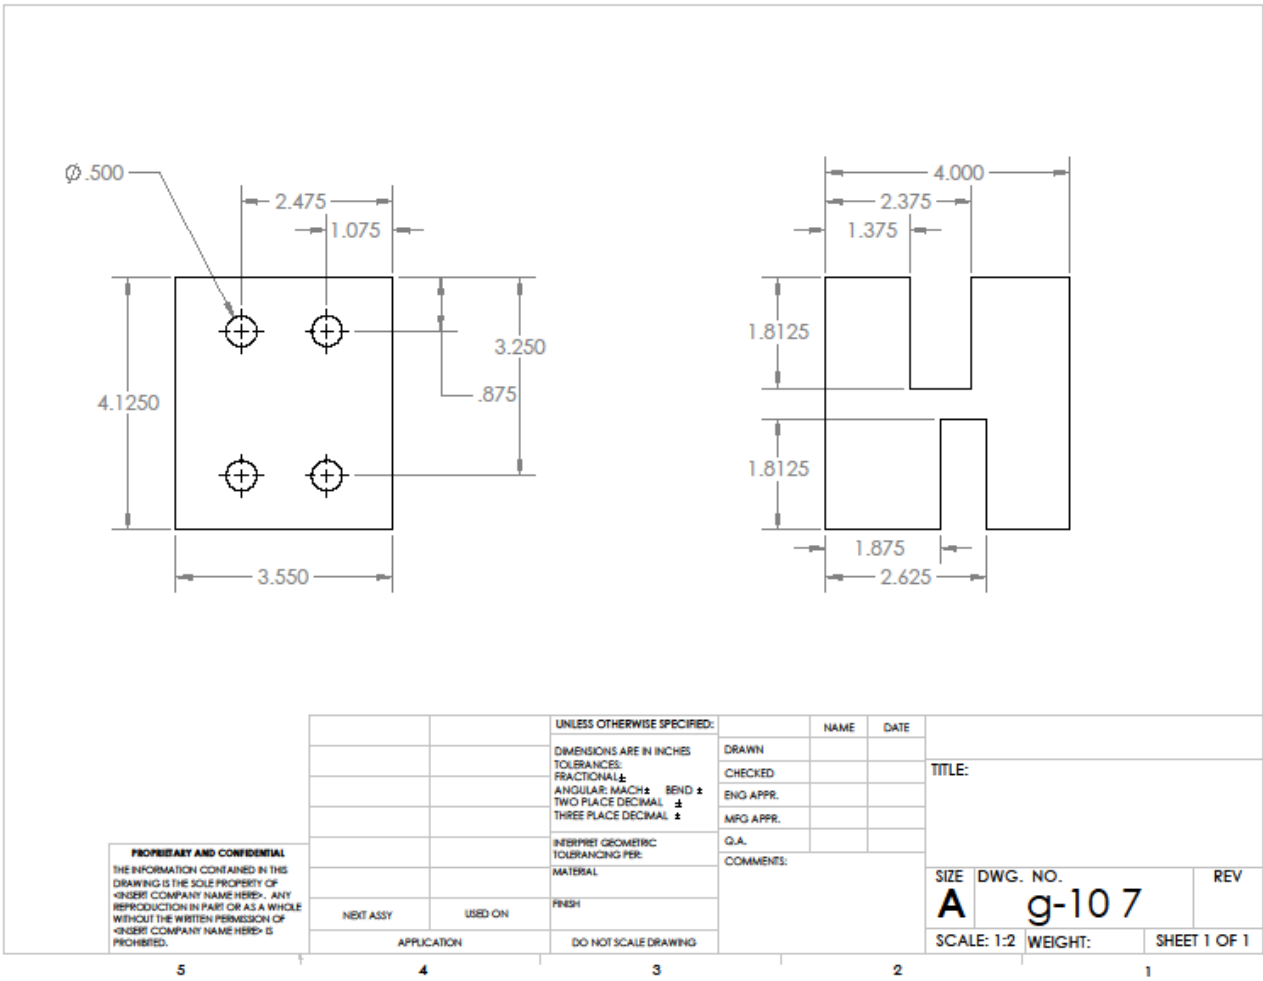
Technical drawing of the G-10 spacer. All dimensions in inches.
